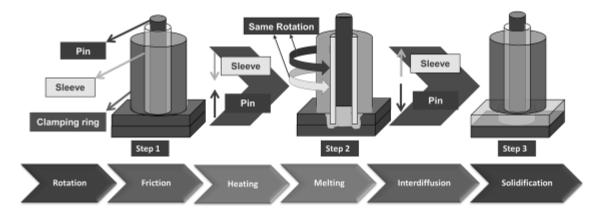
Illustration of the FSpW process, showing the tool and the main steps
